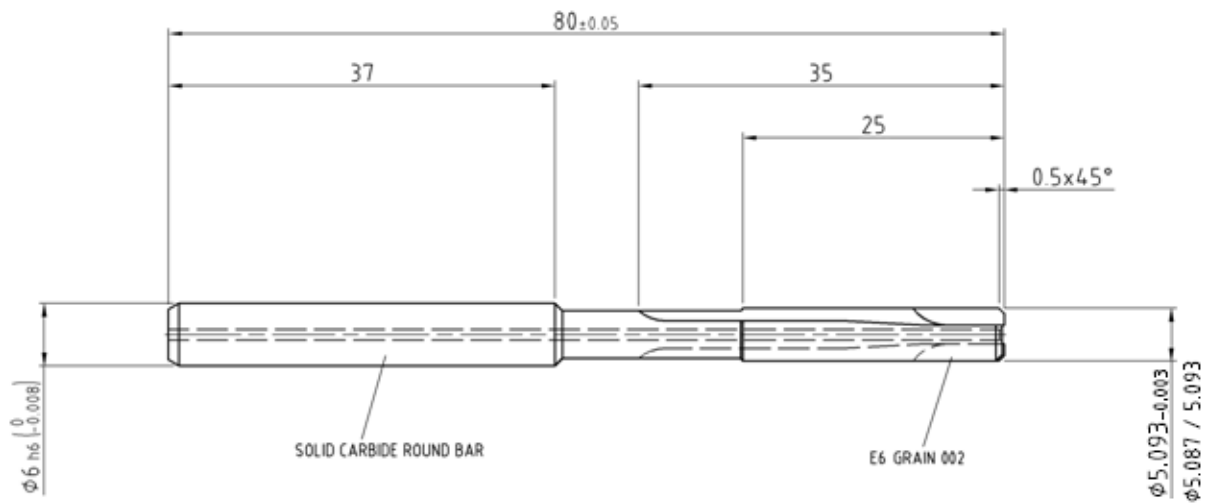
Mapal brazed PCD CTB002 reamer geometry details [220]
